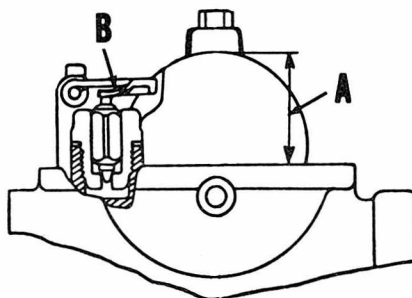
Float level (A) may be adjusted by bending tang (B).
